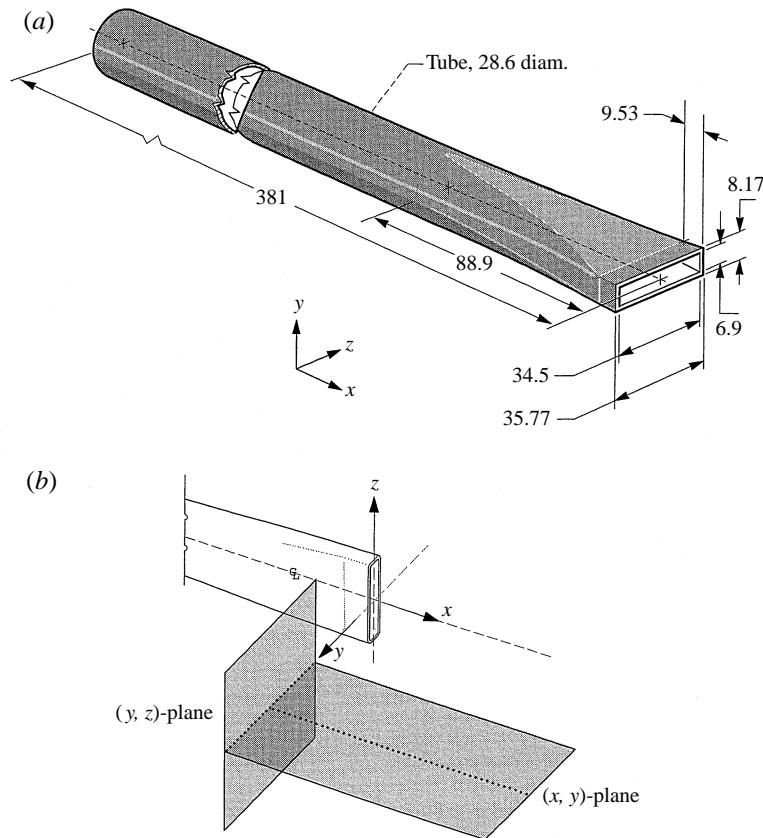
Rectangular jet nozzle and measurement planes. (a) Nozzle with dimensions in mm. (b) Measurement planes for near-field acoustics.
